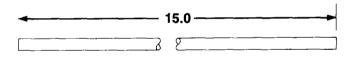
Air Supply Hose Assembly (31-15-2302-90)
